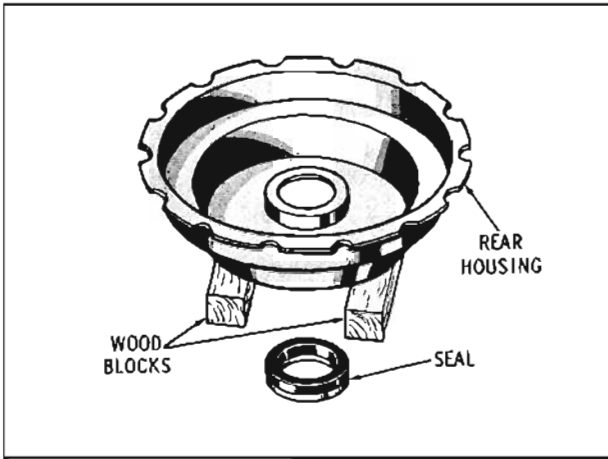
Removal of Bearing Seal from Rear Housing
